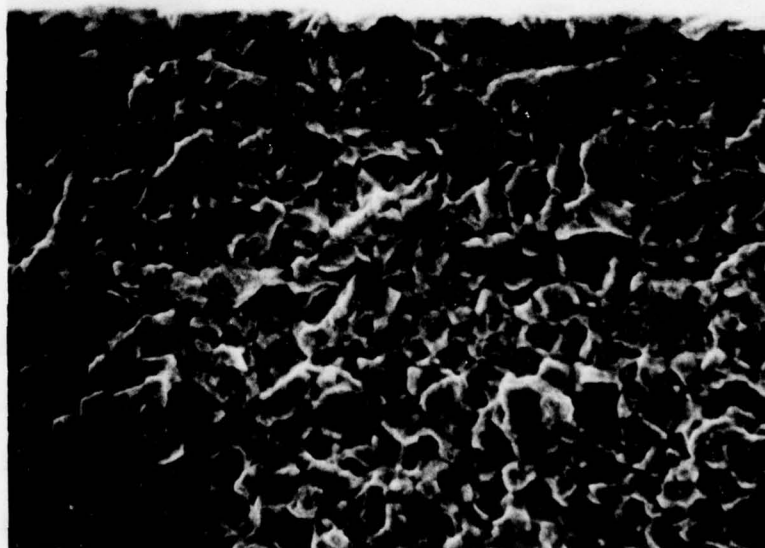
Fatigue Surface, 650°C Dwell Specimen
